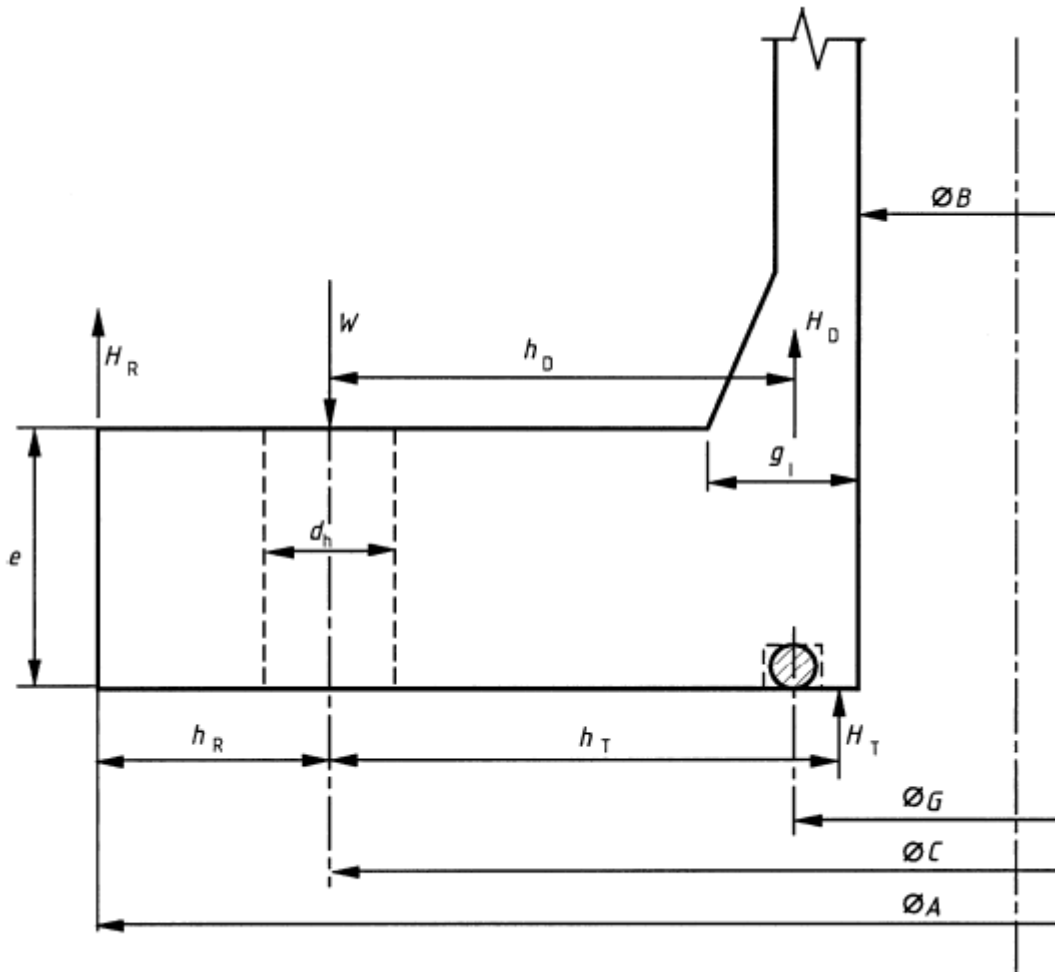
Flange with full face metal to metal contact and O-ring seal
